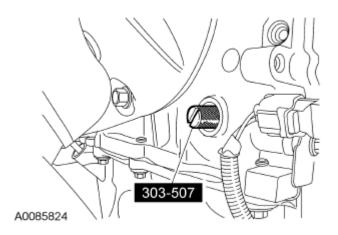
Locating Crankshaft Pulley Hole Bolt (6 mm x 18 mm) Courtesy of FORD MOTOR CO.
